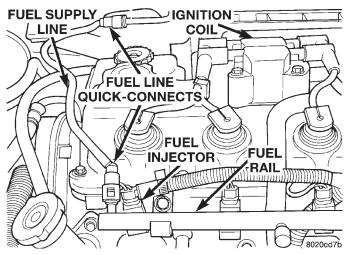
Fuel Injectors—2.0/2.4L Engines
